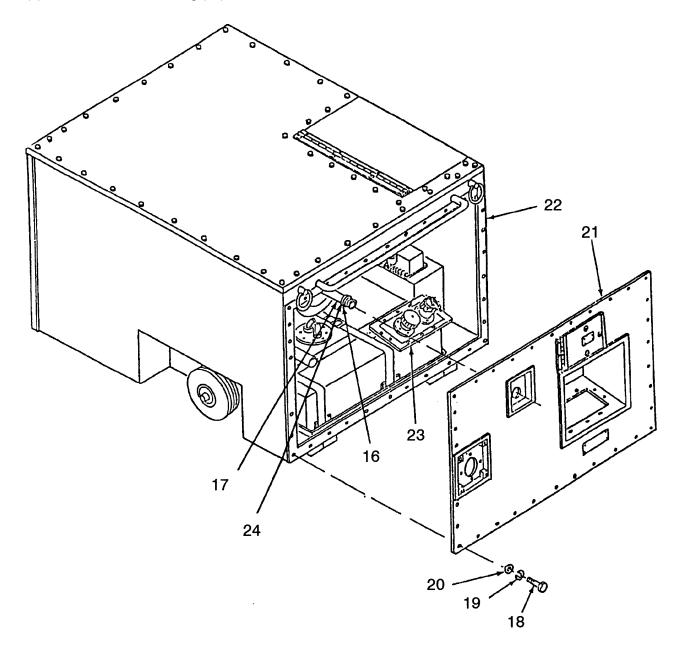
Rear Panel Assembly Removal (Sheet 2 of 2)
